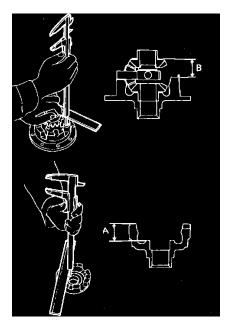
Checking clearance between side gear thrust washer & differential case. 4 pinion type axles
